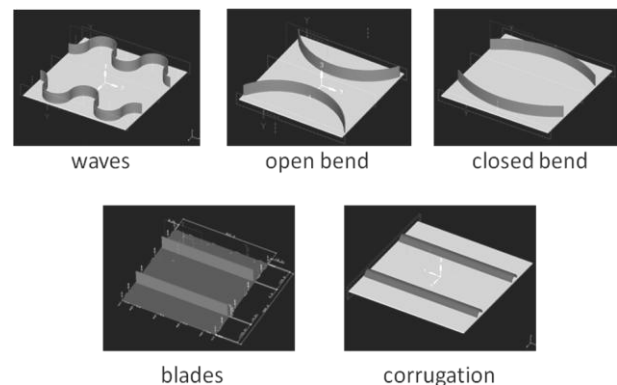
Selected ALM panel designs. Uni-axial load, plate dimensions: 500 x 500 mm, stiffener height: 50 mm, materials: Ti 64, generic mild steel.
